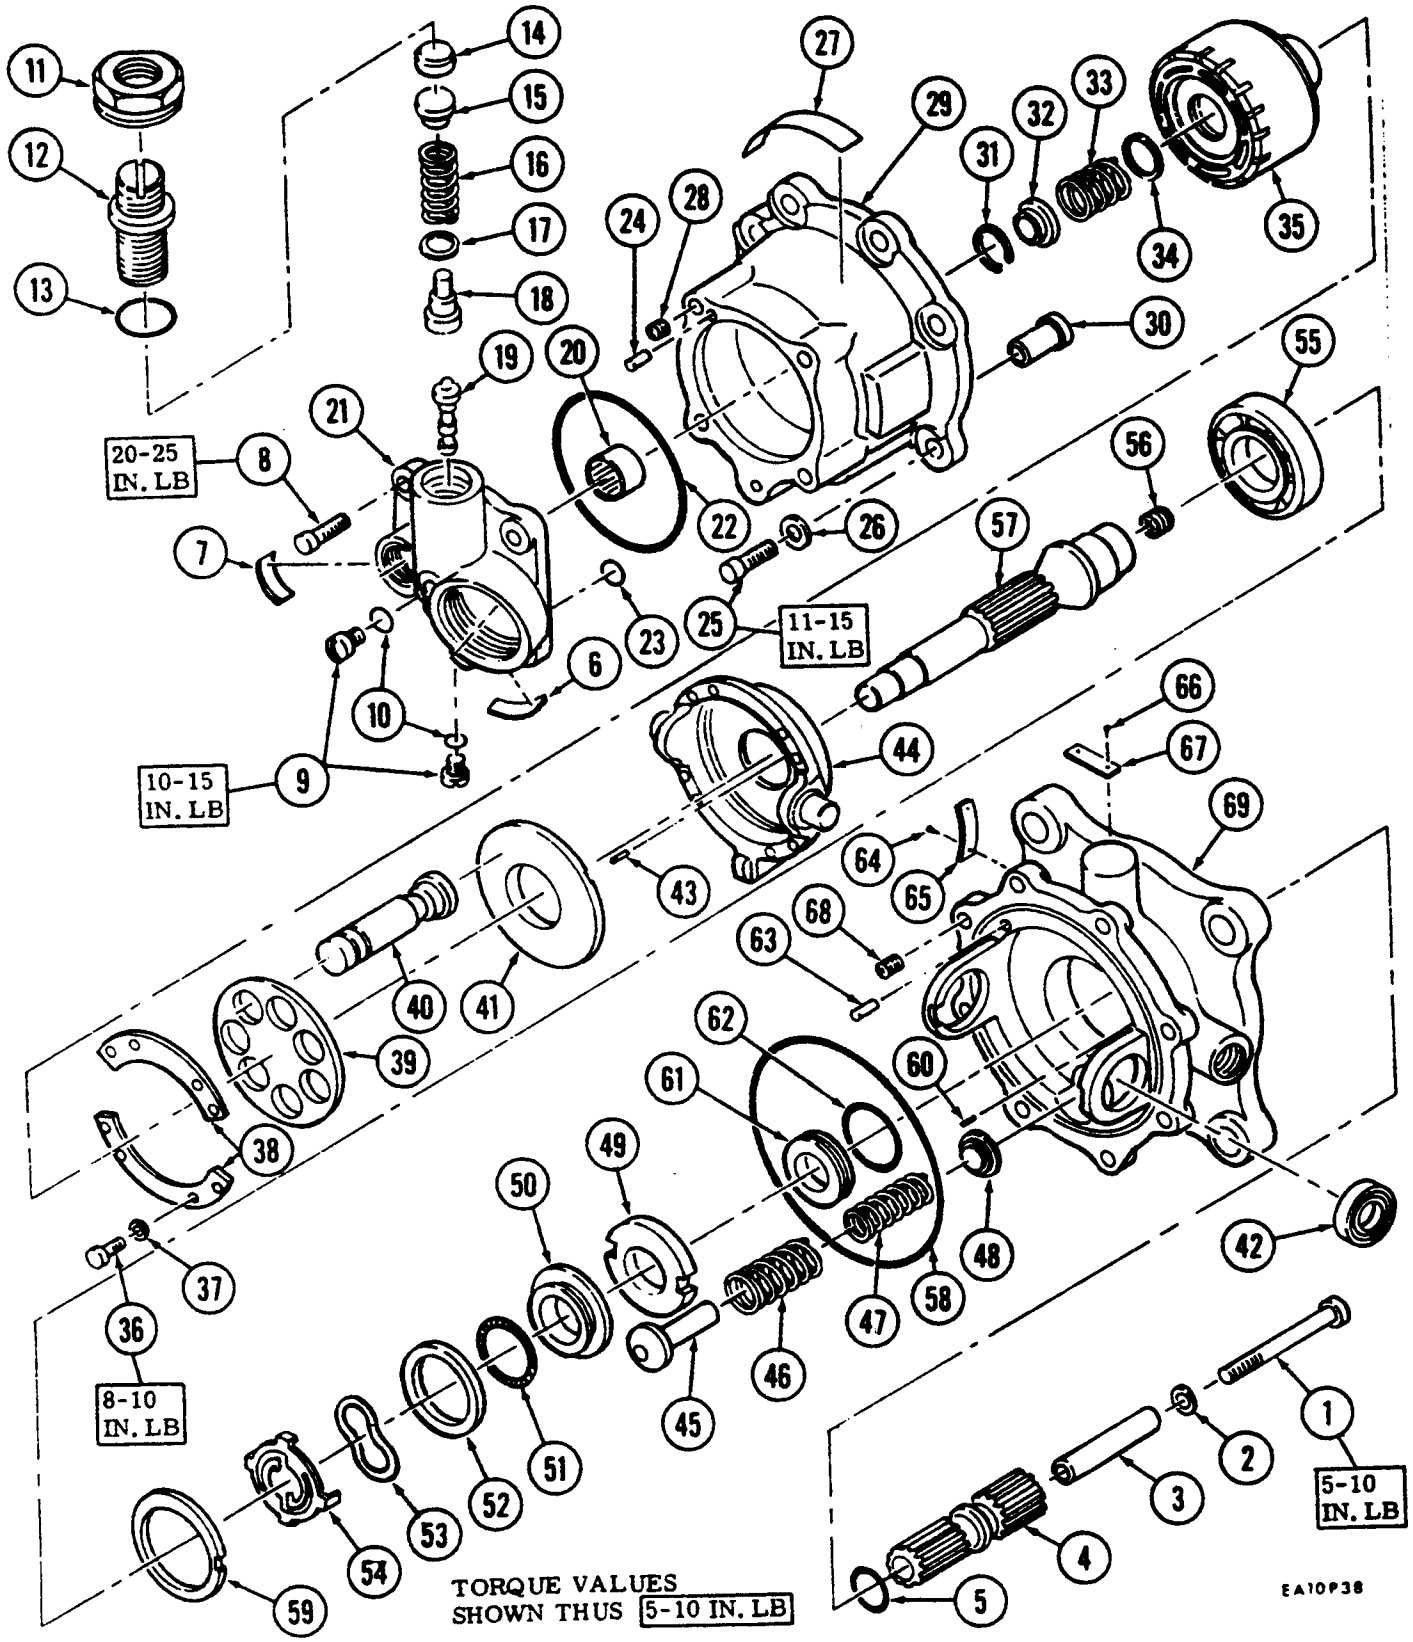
Variable Displacement Hydraulic Pump Assembly Exploded View (Sheet 1 of 2)
